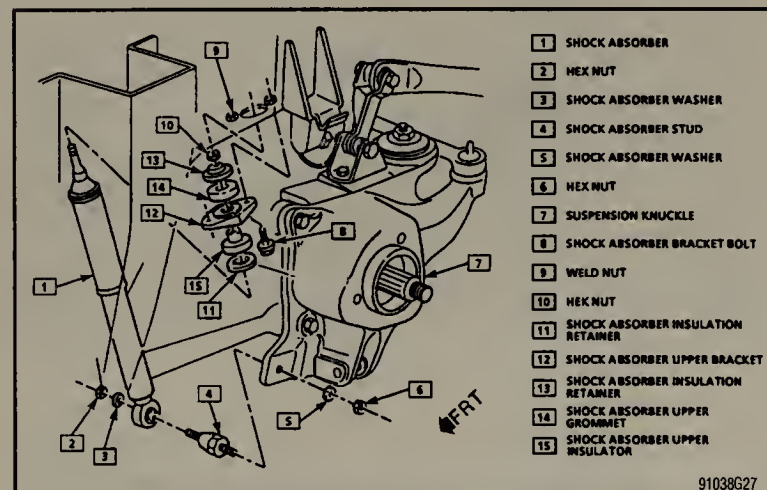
Exploded view of the shock absorber and mounting bracket—1996 vehicle shown, others similar
